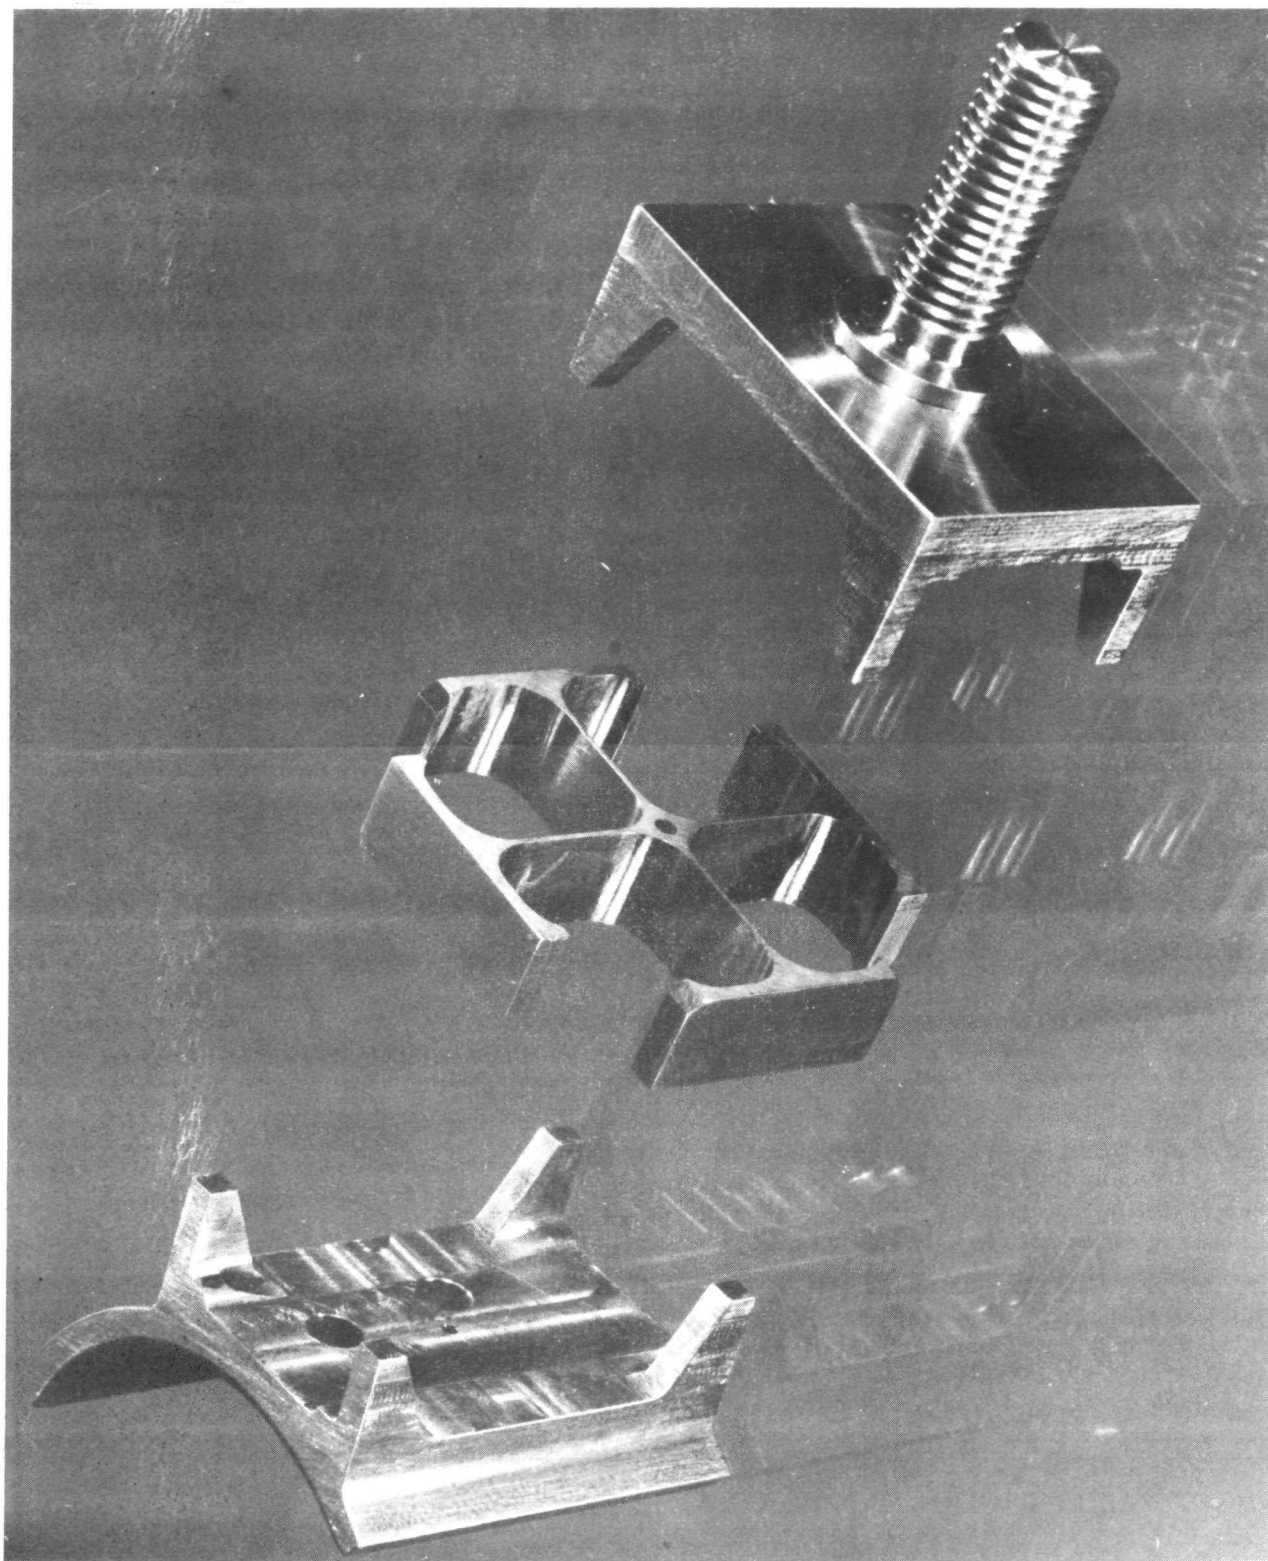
Major Parts for Cruciform-Supported Test Pad
